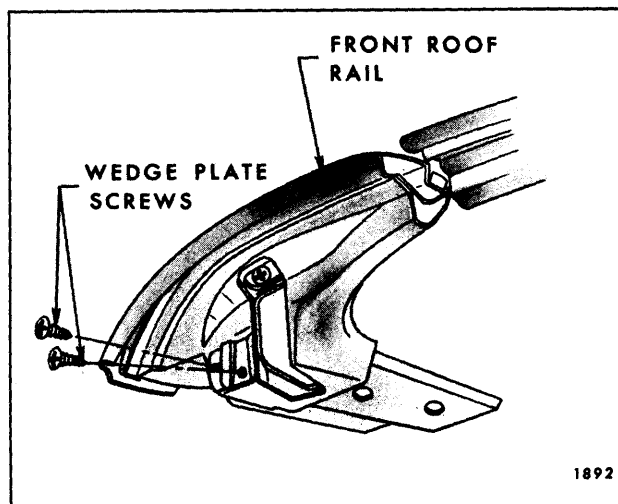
Front Roof Rail Wedge Plate - "Z" Styles
